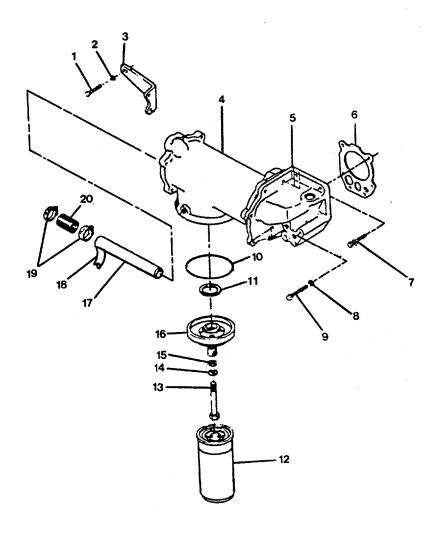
Lubricating Oil Cooler/Filter Group.
